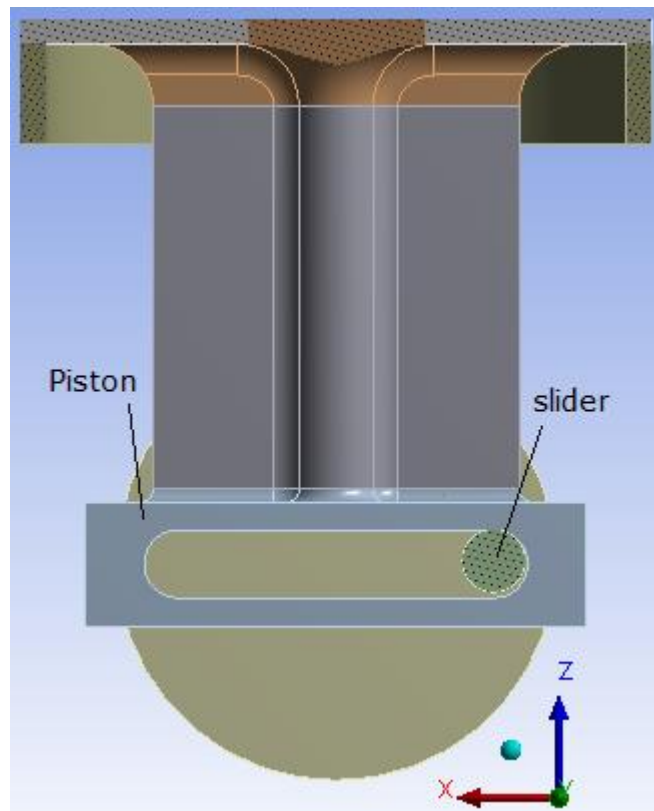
Top cut section view of shaft slider contact with the piston.
